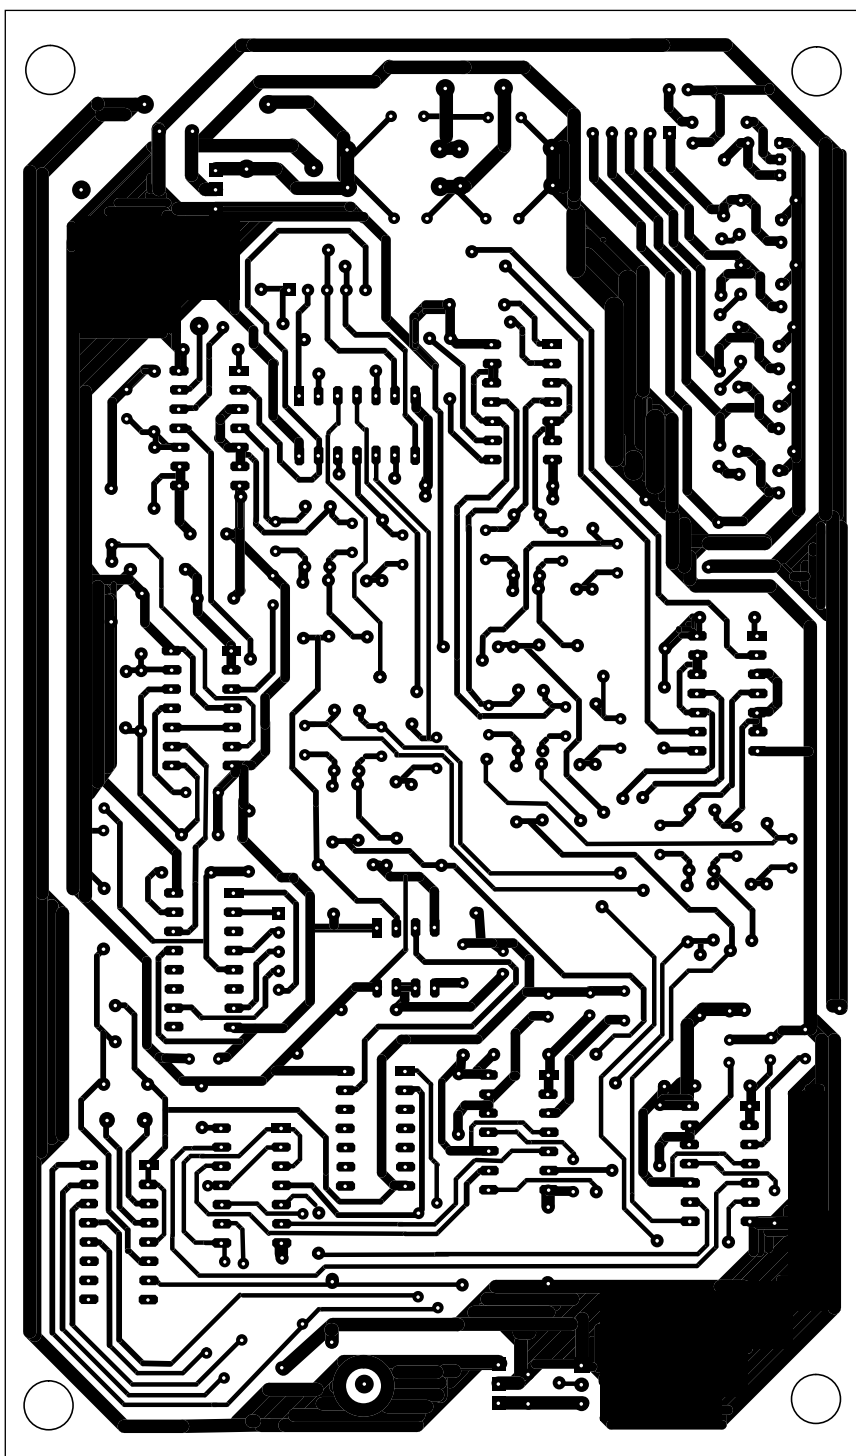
Actual-size, single-side PCB for circuits of Figs 1 and 3 (PCB-1)
